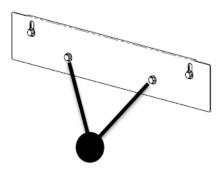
Flat Plate and Angle Bracket Attached (Front)
